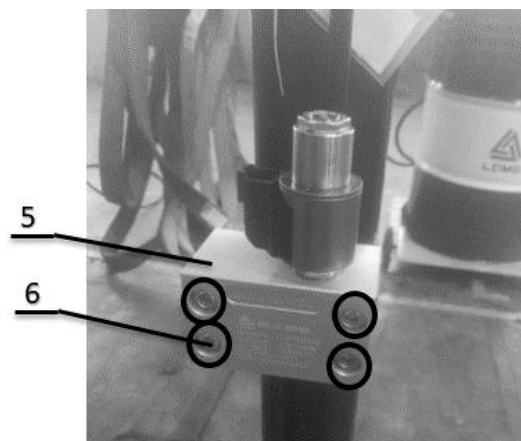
Outrigger cylinder solenoid valve assembly
